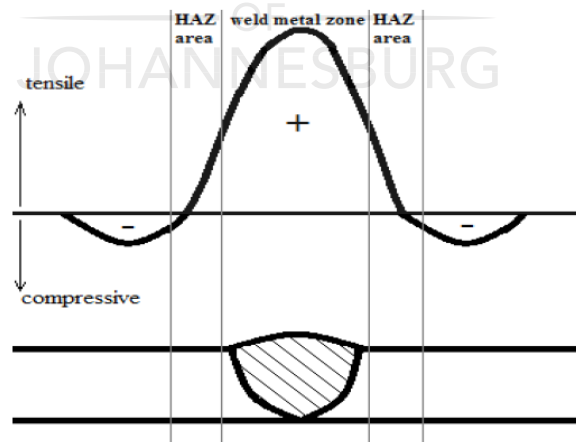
Distribution of weld residual stresses in a weldment [143]
